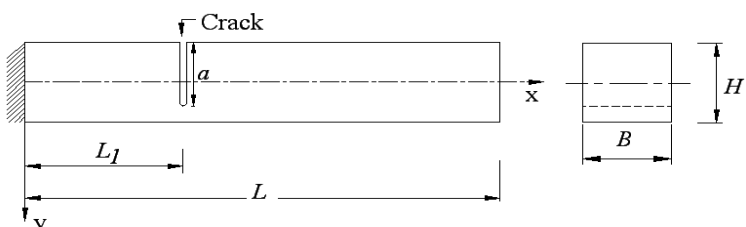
A Rectangular-shaped open edged cracked cantilever beam
